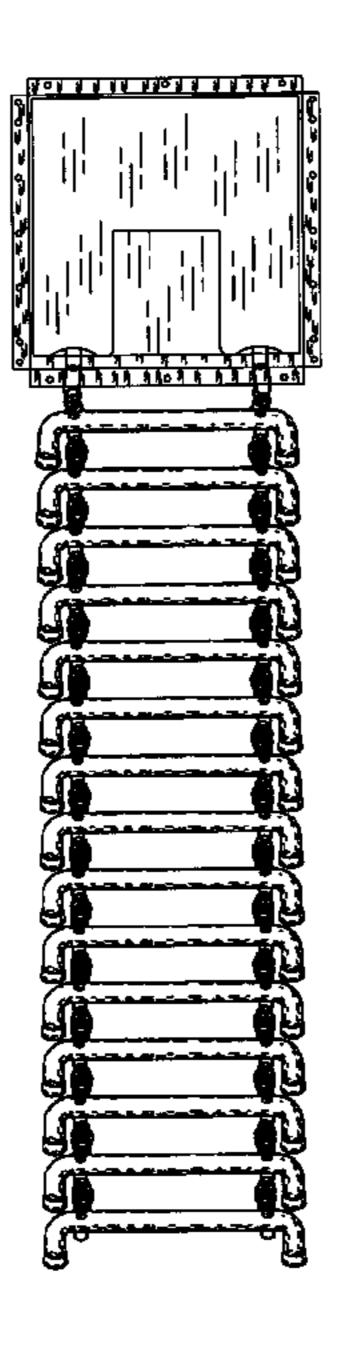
is a right side elevational view of the storable fire escape ladder showing my new design with the drawer opened and ladder extended and mounted within a wall which is substantially symmetrical with a left side elevational view thereof. For clarity purposes, the ladder portion is only partially shown. For illustration purposes only, the ladder portion is shown extending from a window and said window forms no part of the claimed design.
